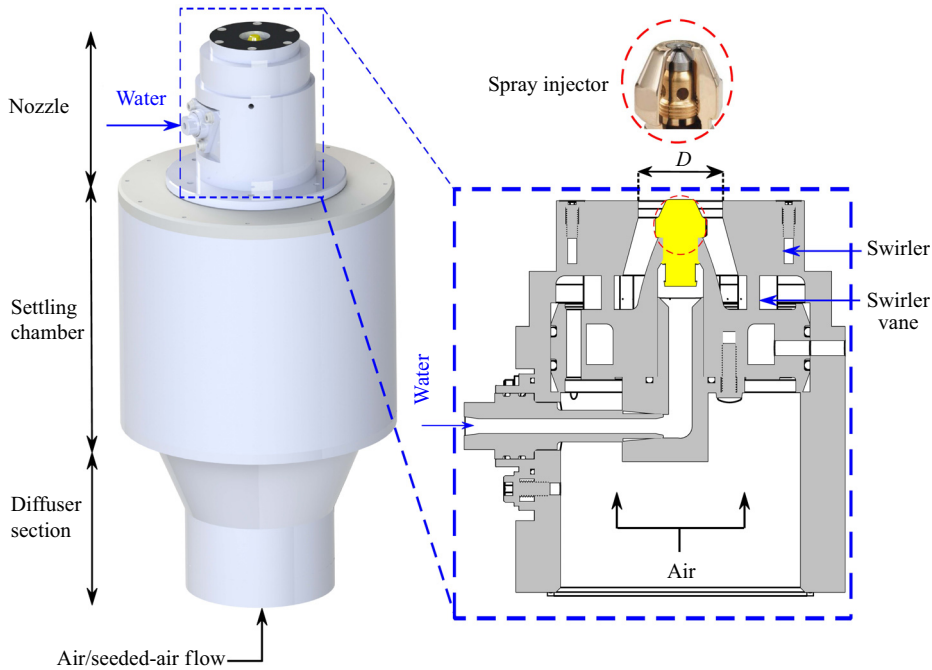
The flow apparatus, which is composed of a diffuser section, a settling chamber and a nozzle. The inset on the right-hand side is the technical drawing of the nozzle cross-section as well as a picture of the atomizer tip.
